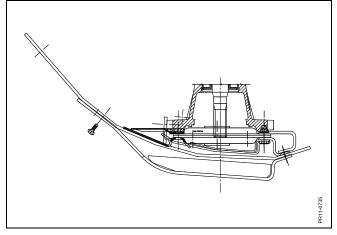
Mount the large guide shoe under the existing guide shoe, under the gearbox.
